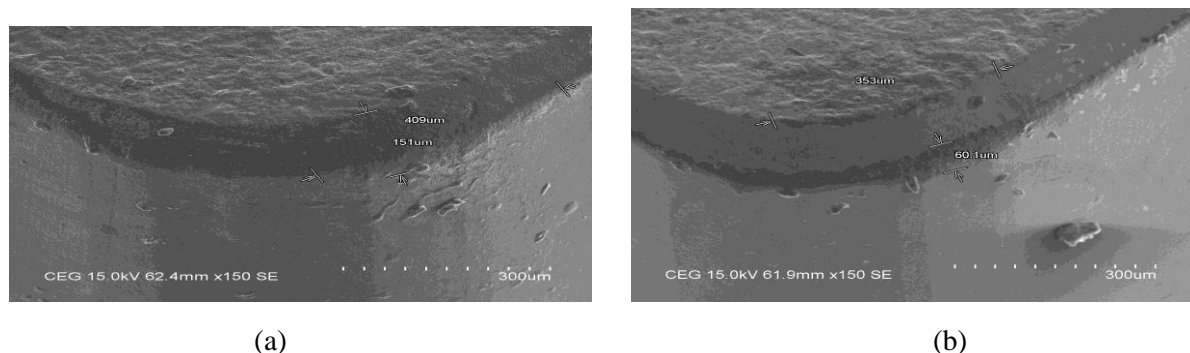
SEM images of uncoated and TiN coated PCBN cutting tool edge. (a) Cutting edge of uncoated PCBN cutting tool after cutting 600mm of CFRP; (b) Cutting edge of TiN coated PCBN cutting tool after cutting 600mm of CFRP.
